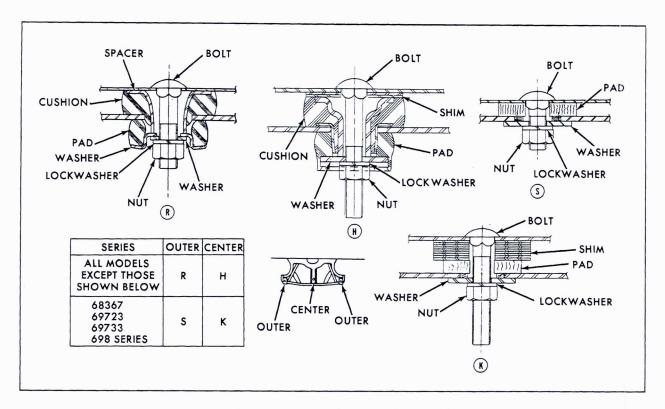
Radiator Cradle Mounts (Except 693)
